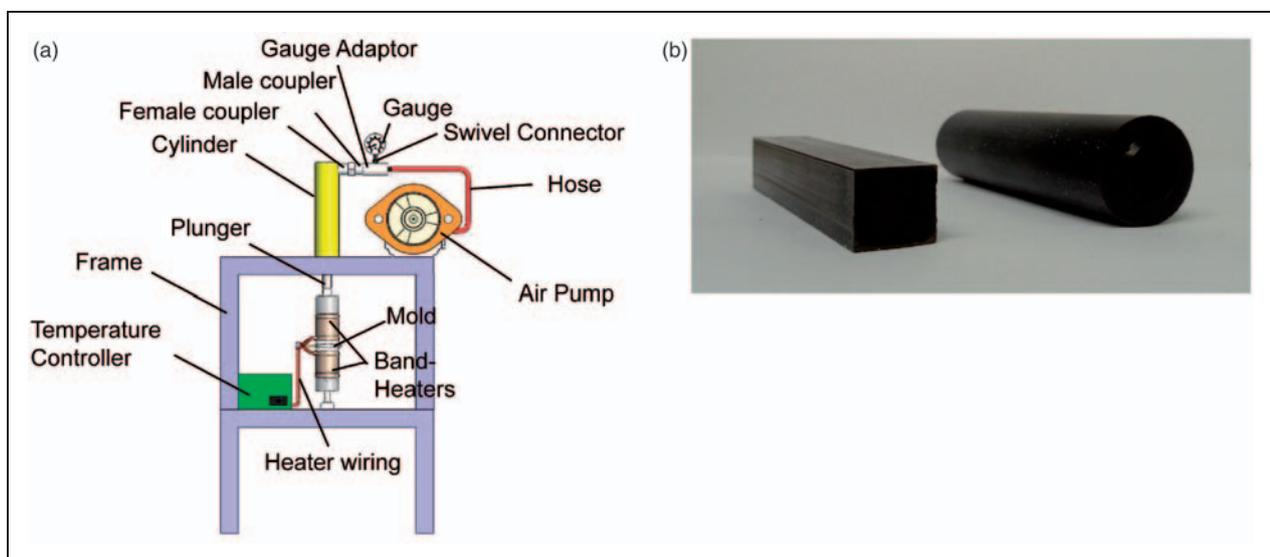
(a) Schematic diagram for the production of WPC test specimens. (b) Typical WPC samples, produced from two different molds.
